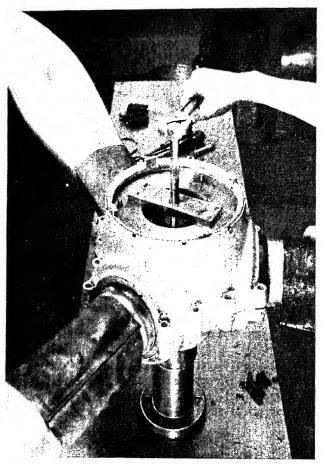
USING SPECIAL TOOL TO SPLIT BARREL, WHICH EASES THE BLADE-PACKING NUTS, ENABLING THEM TO BE UNSCREWED, AS SHOWN IN FIG. 18.
